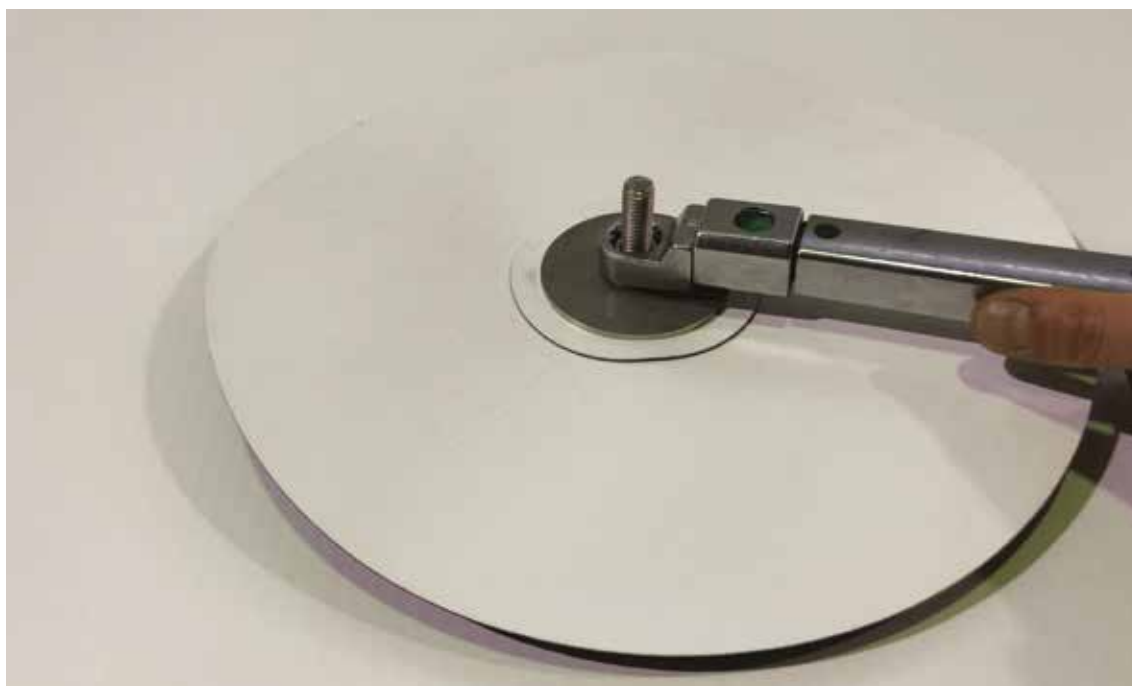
Tightening with a torque wrench, suggested torque 40 Nm with pre-tightening at 20 Nm
